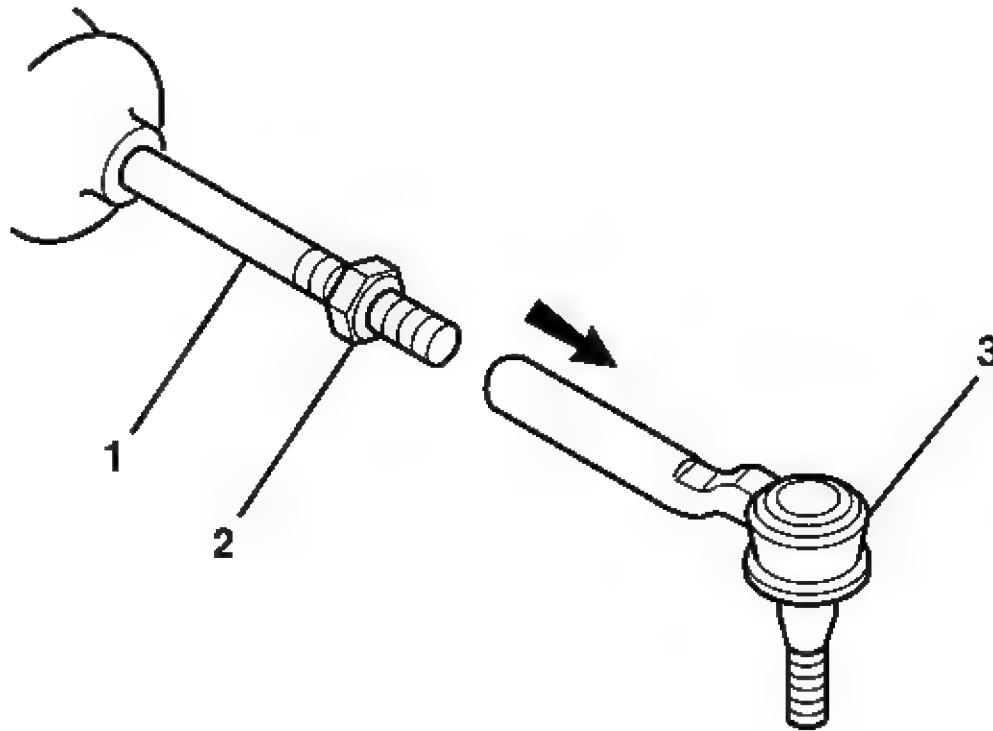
Removing Outer Tie Rod Assembly From Inner Tie Rod Assembly
